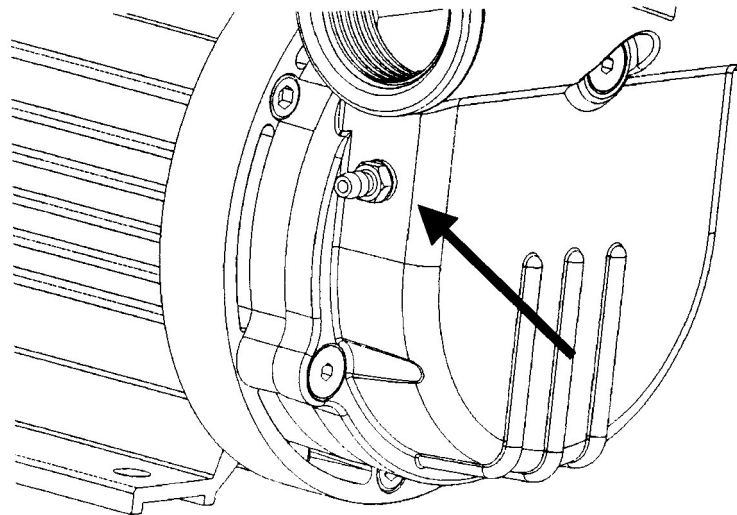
Fehler! : Threaded nozzle for Siphon Protection screwed in place
